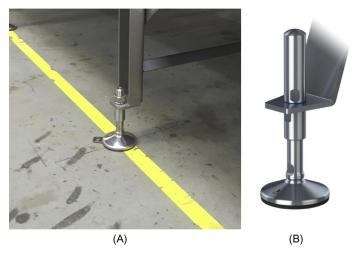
(A) Fixation of the leveling feet onto open profile legs may not leave thread parts exposed. (B) A top sleeve with O-ring seal and round top must be used to cover the exposed thread parts. *Courtesy of NGI A/S*.
